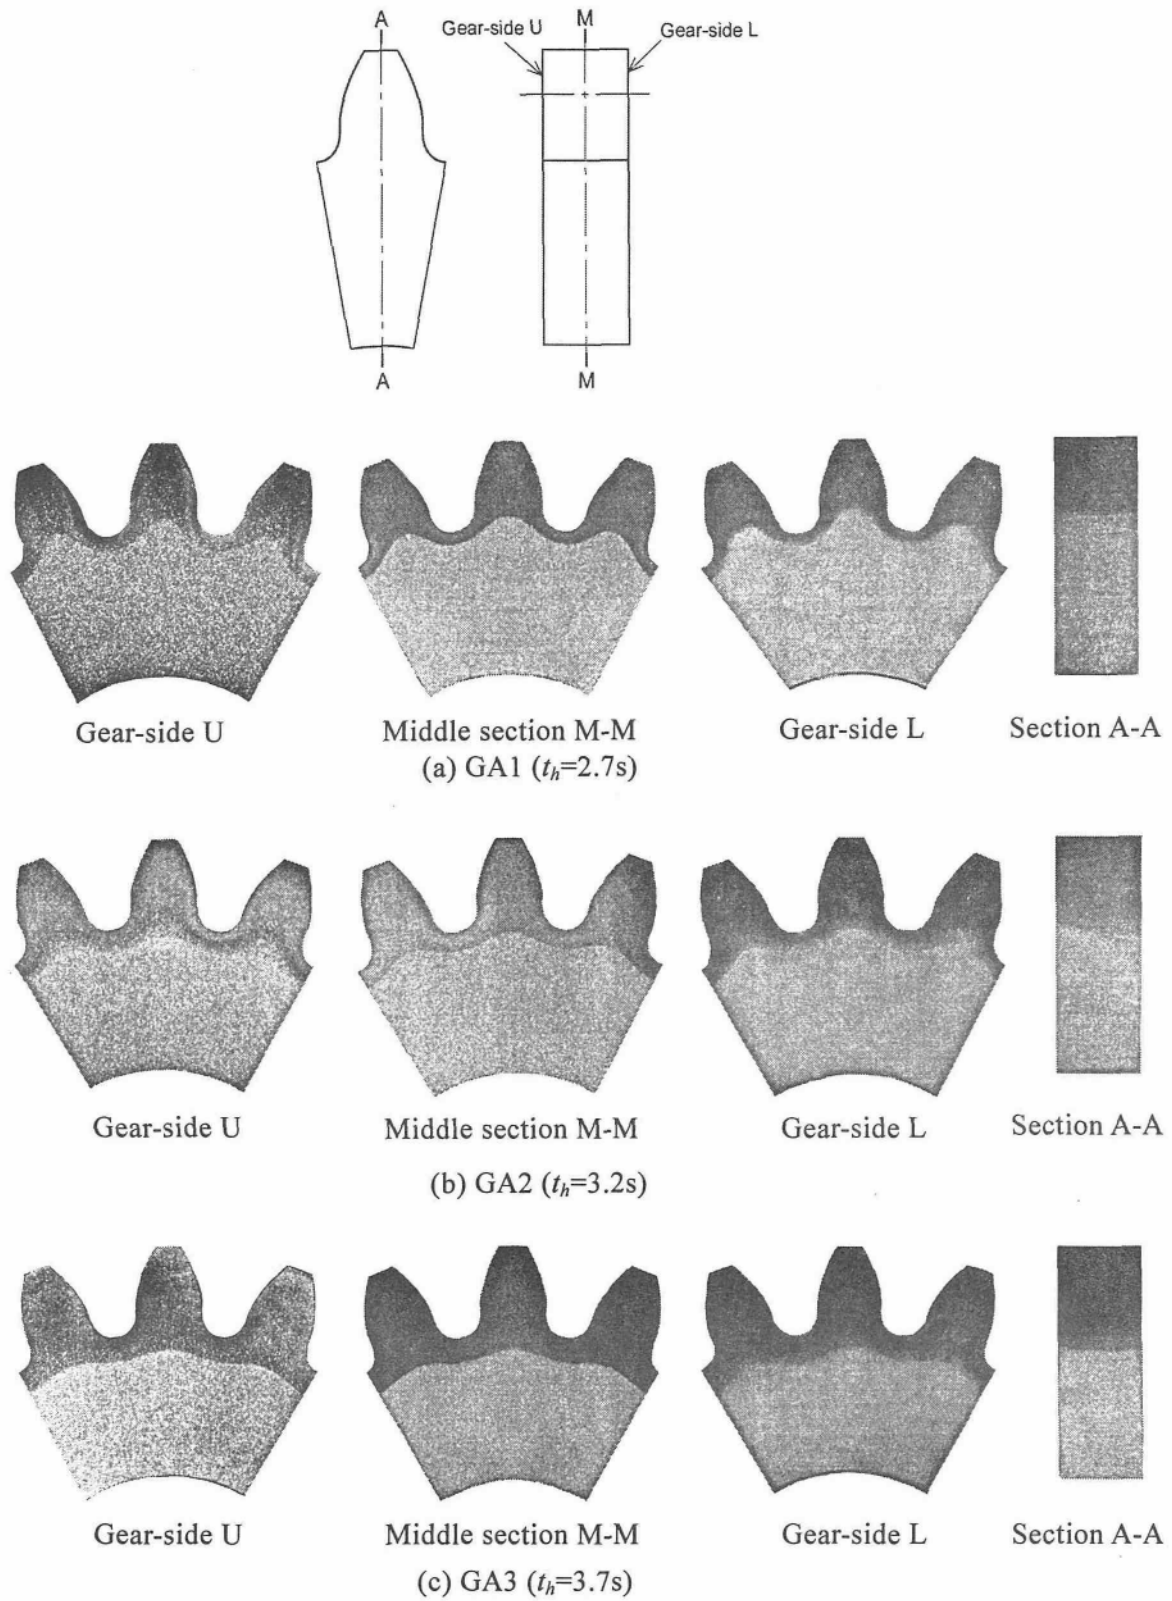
Photographs of macro-structures of test gears (Coil A)
